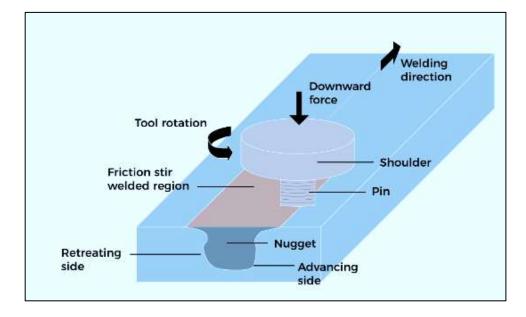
Friction stir welding generates frictional heat using a rotating tool known as a "shoulder", which runs along the joint of the different components.
